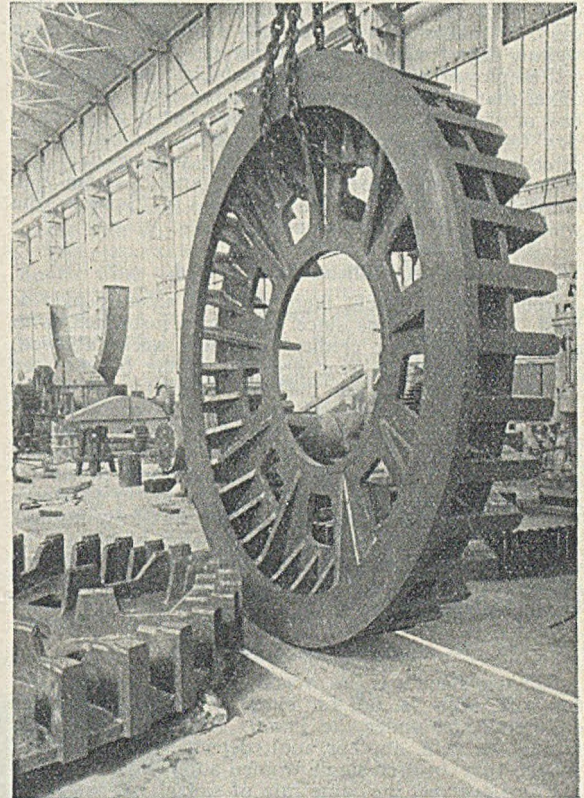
TWO HALVES OF A CAST-STEEL ROTOR PROOF MACHINED READY FOR ASSEMBLY.
